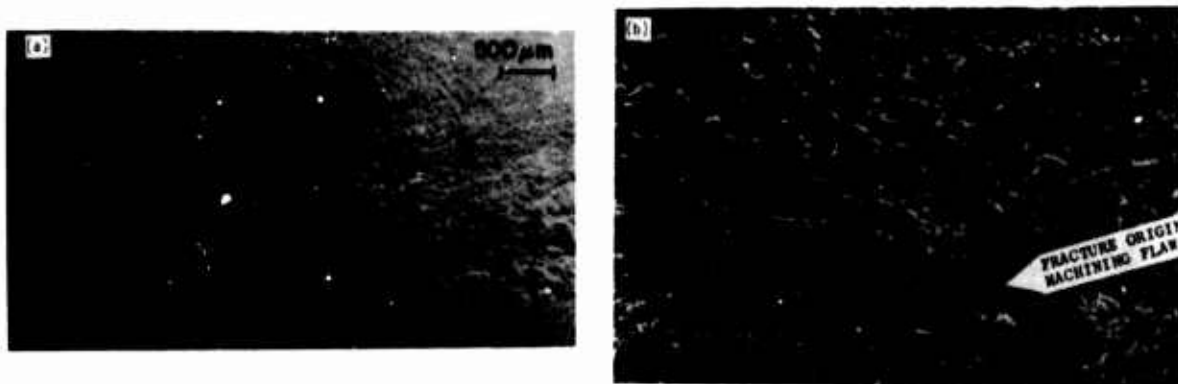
Failure of a larger B_4C machined test bar. The material and machining are essentially the same as that in Fig. 20, however the specimen was substantially larger having cross-sectional dimensions of approximately .25" x .5" with a proportionate increase in the flexure span length. It failed from a substantially larger machining flaw (arrows in (b)) and at a substantially lower stress, approximately 29,000 psi.
